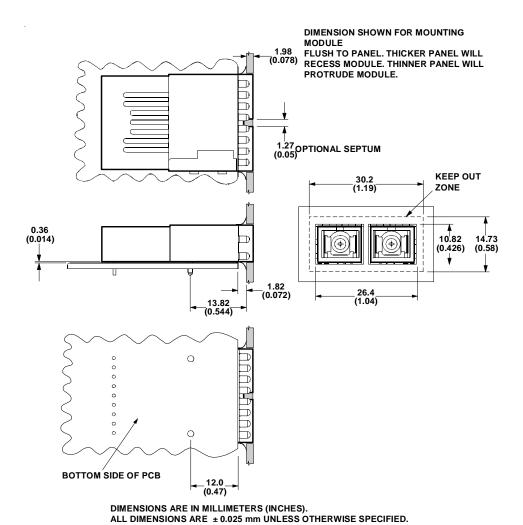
Suggested module positioning and panel cut-out for HFBR-53B3FM.
